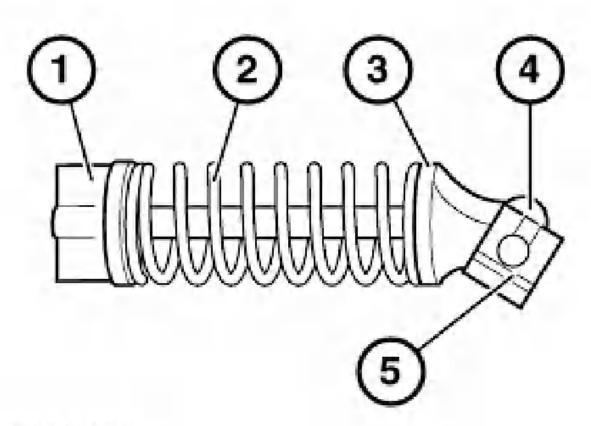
Identifying Brake-Pedal Assembly Courtesy of BMW OF NORTH AMERICA, INC.
